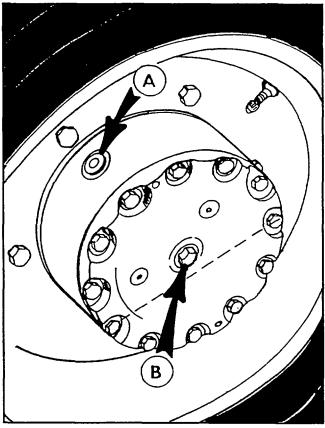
Front Wheel Planetary System A. Drain Plug; B. Filler Plug
